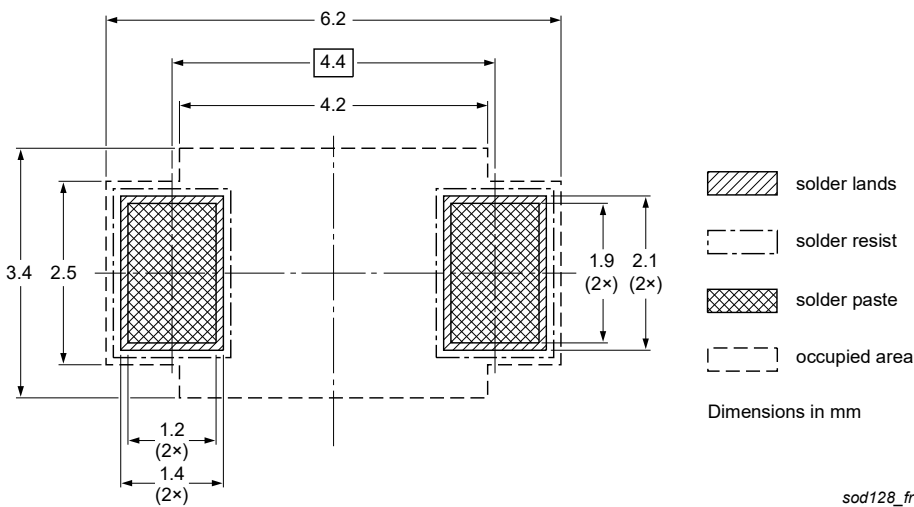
Reflow soldering footprint for CFP5 (SOD128)
